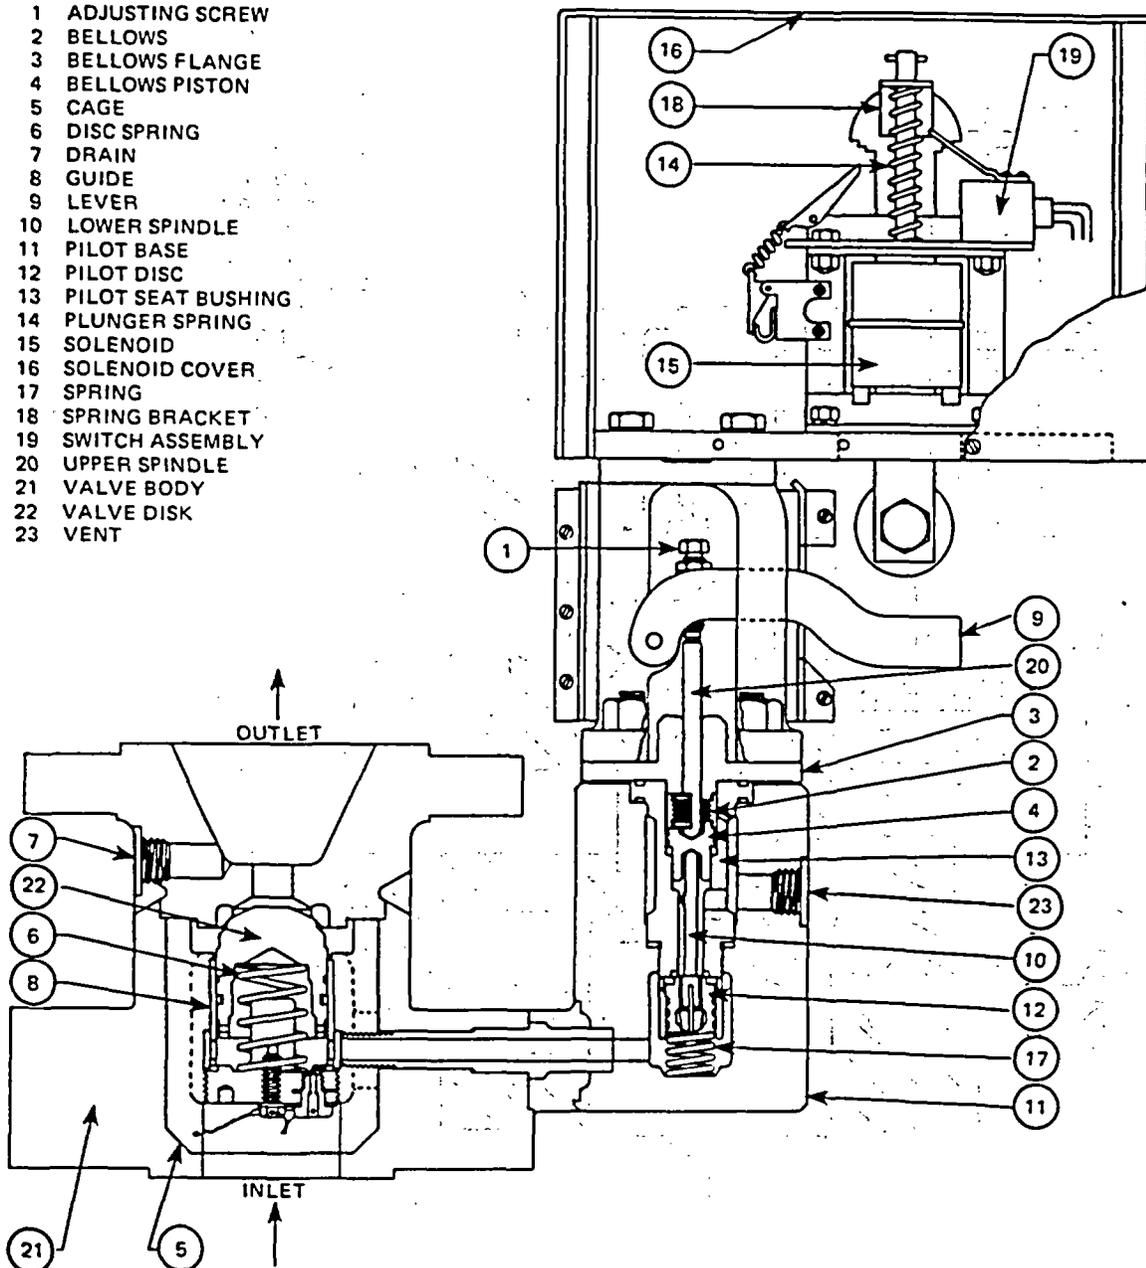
Pilot-operated relief valve (Courtesy of Dresser Industries)
